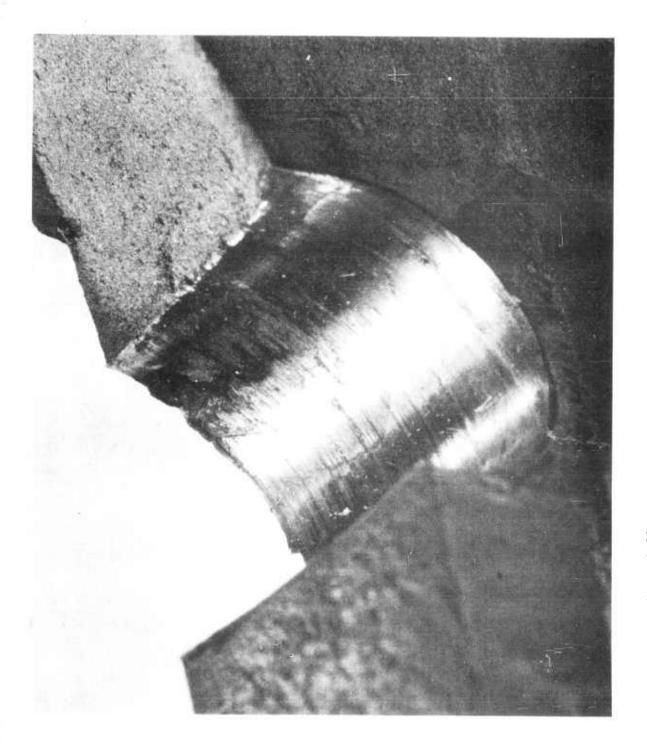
Rear Spar Fracture Area -- View of Crack in Burr
